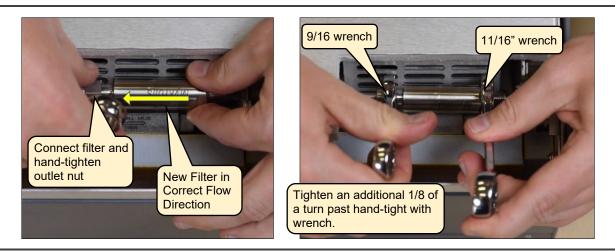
Connect New Filter to Outlet Swagelok Fitting and Tighten
